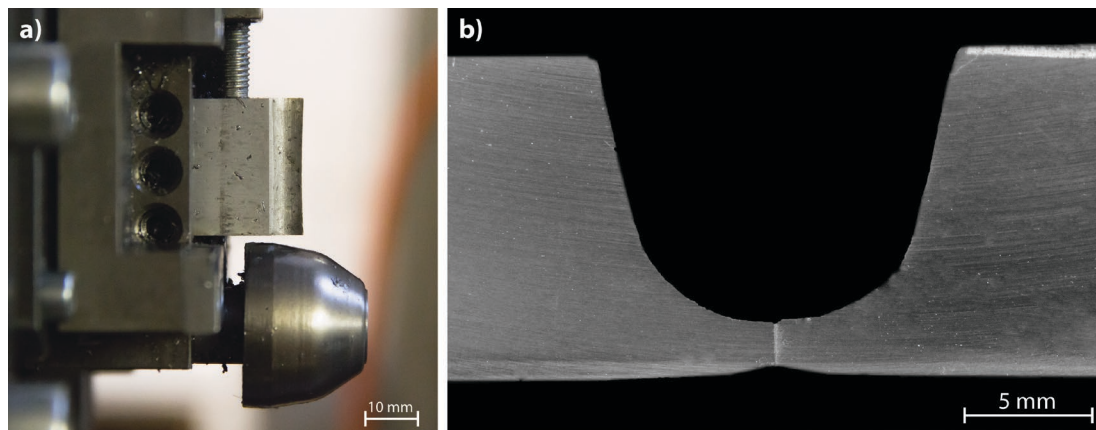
(a) ID-tracker equipped with facing tool and (b) J bevel prepared with ID-tracker accessory.
